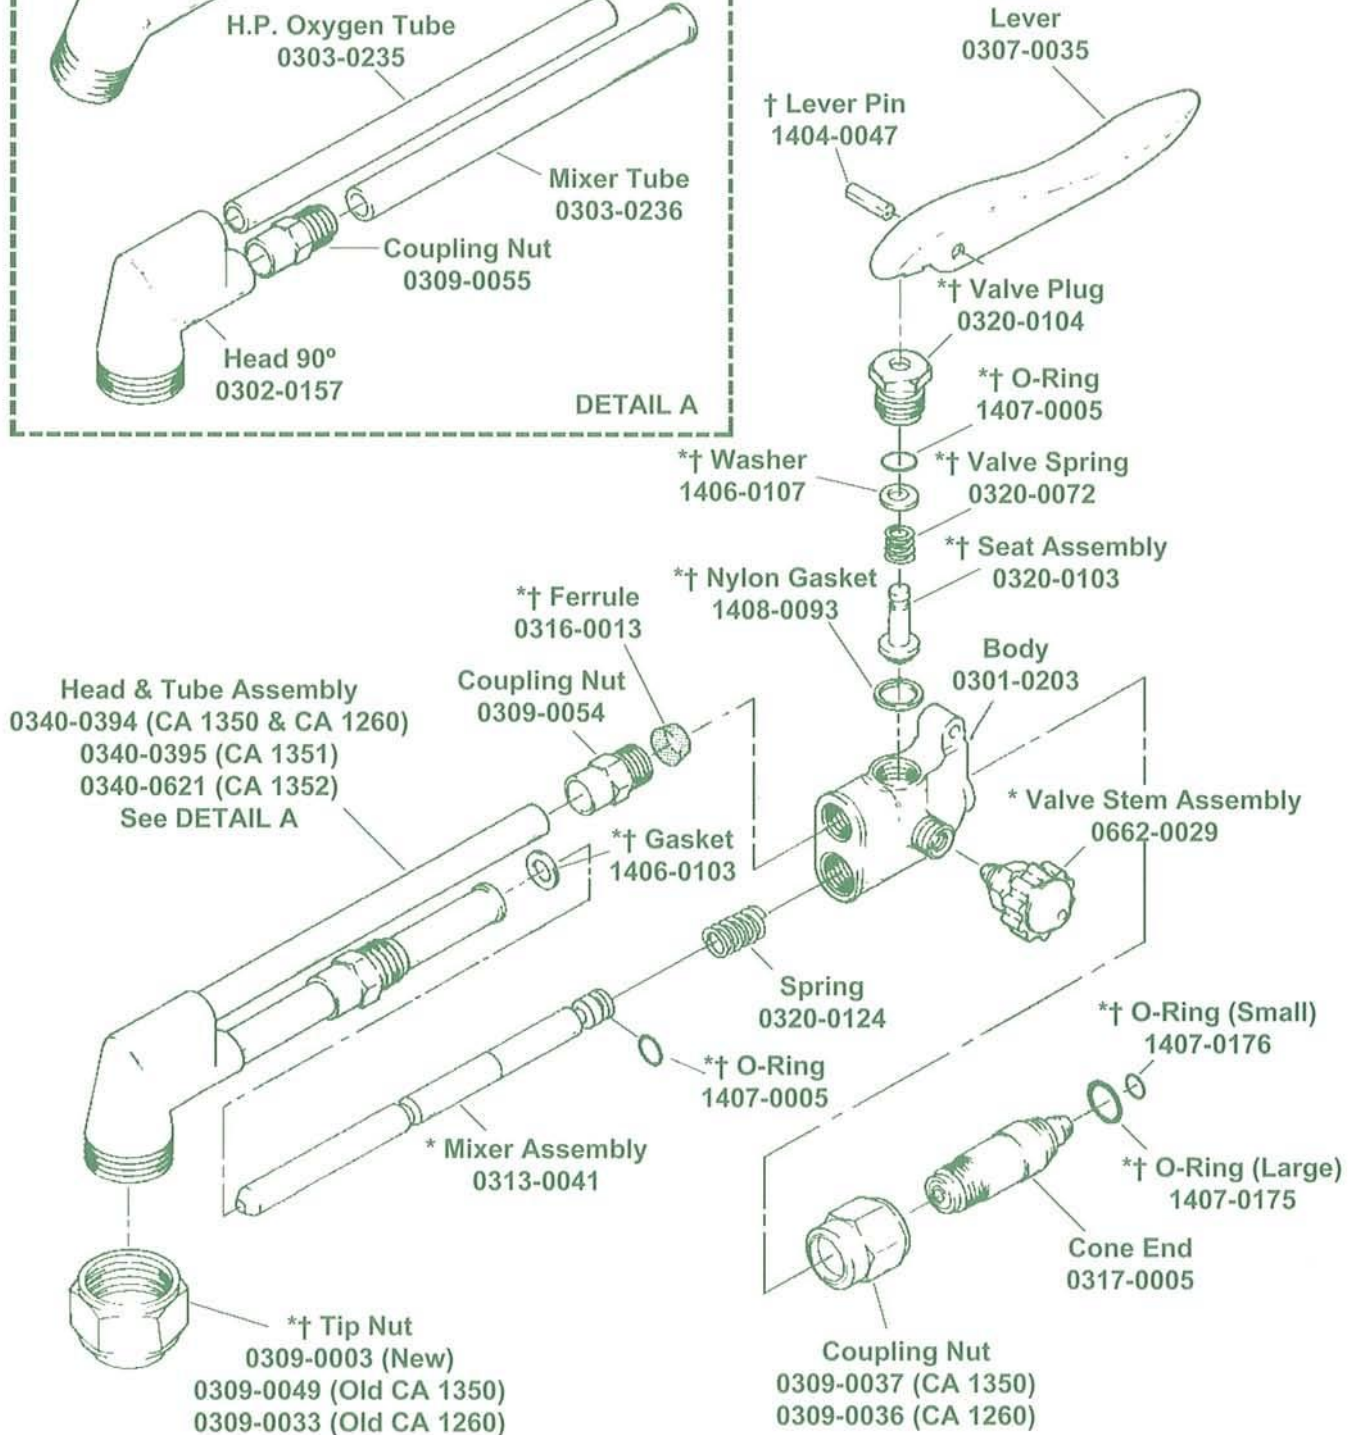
CA 1350 Series and CA 1260 Cutting Attachments
